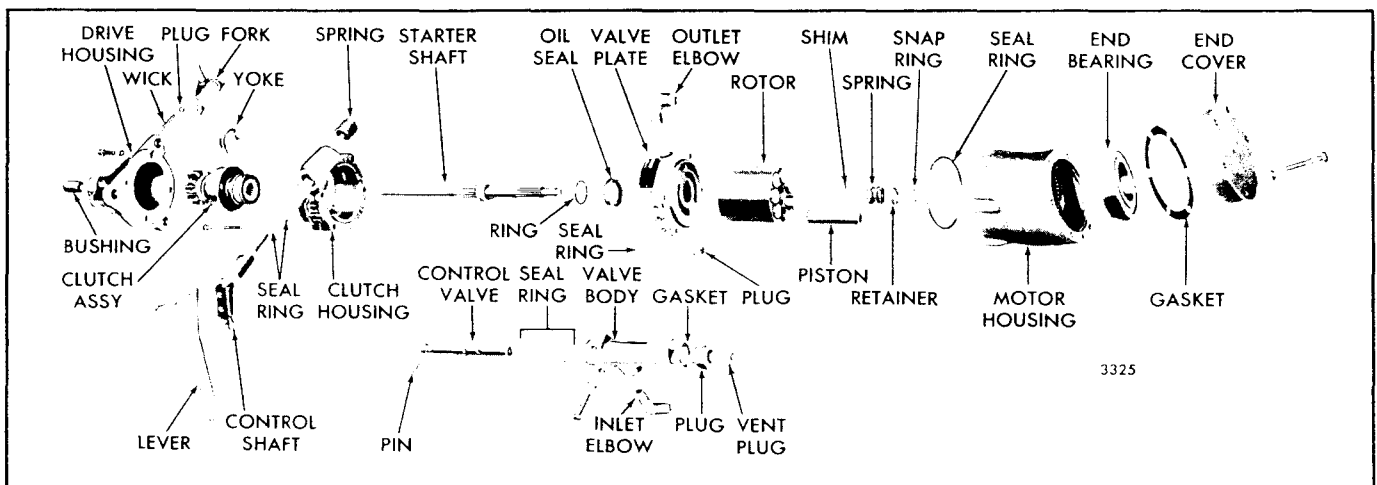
Hydrostarter Motor Details and Relative Location of Parts
